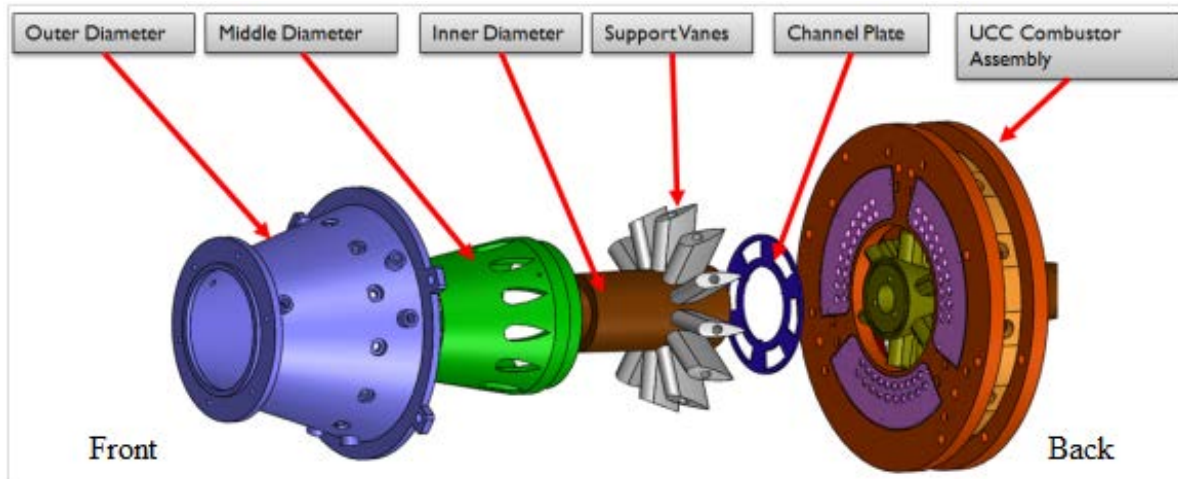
Part breakout and exploded view of AFIT UCC diffuser section [50]
